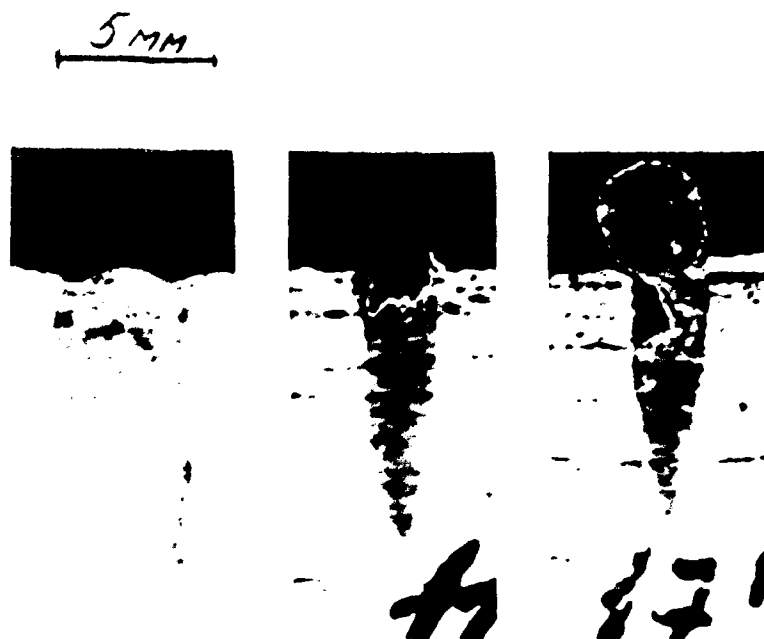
Characteristic view of weld defects in high intensity radiation welding.
